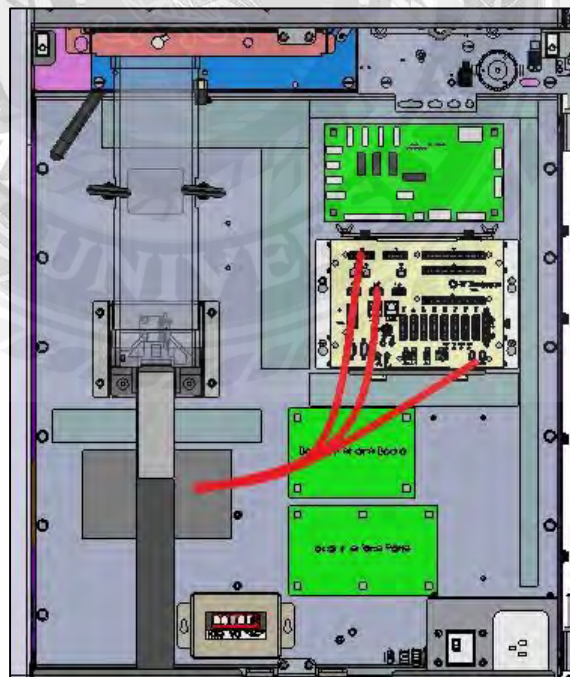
Cable Routing for STE 9812-0320 REV00
